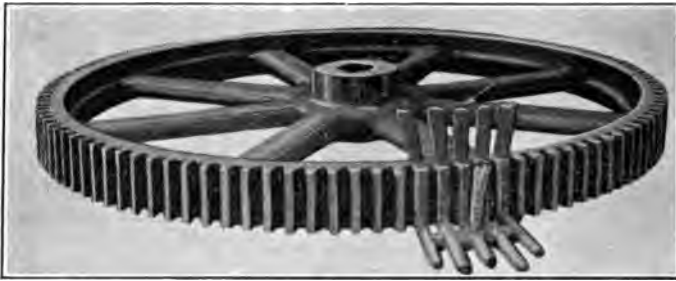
THE ABOVE IS A THERMIT WELD, IN WHICH NEW TEETH HAVE BEEN WELDED IN.
